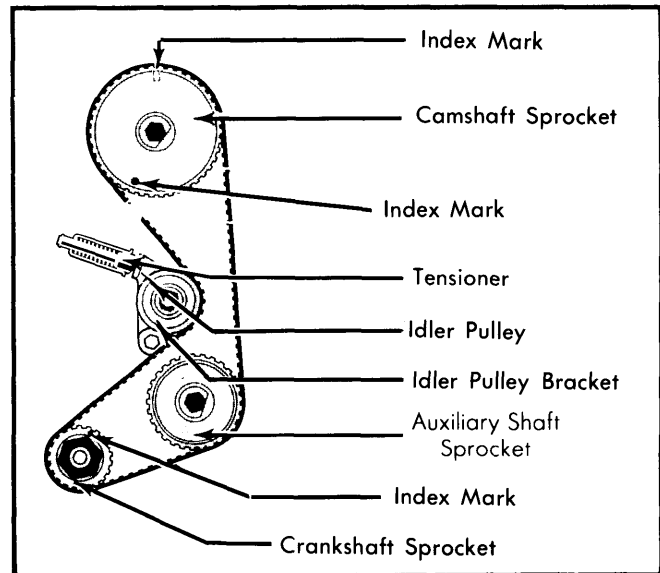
Timing Belt Correctly Installed on Camshaft, Auxiliary Shaft and Crankshaft Sprockets
